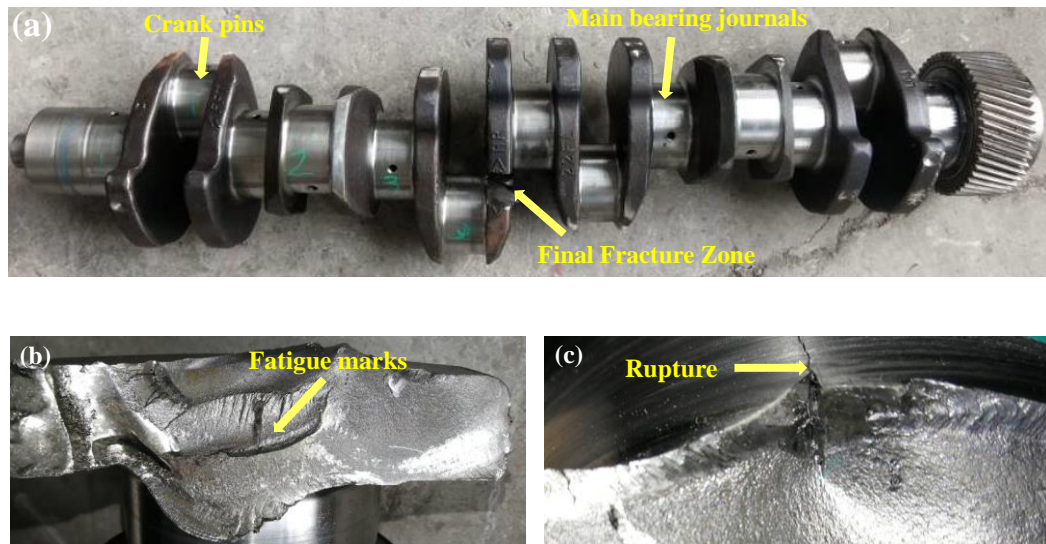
Macro observation of the 0-kilometer Lava crankshaft
